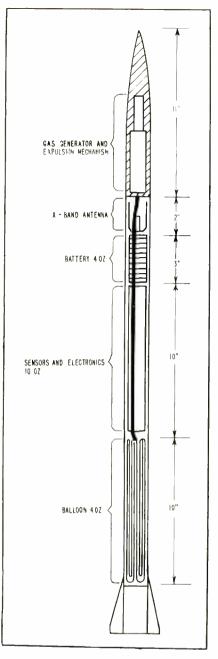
Telemetering missile is 40 in. long, $1\frac{3}{8}$ in. outside diameter and weighs 6.3 lbs. About 26 cu in. is for electronics
